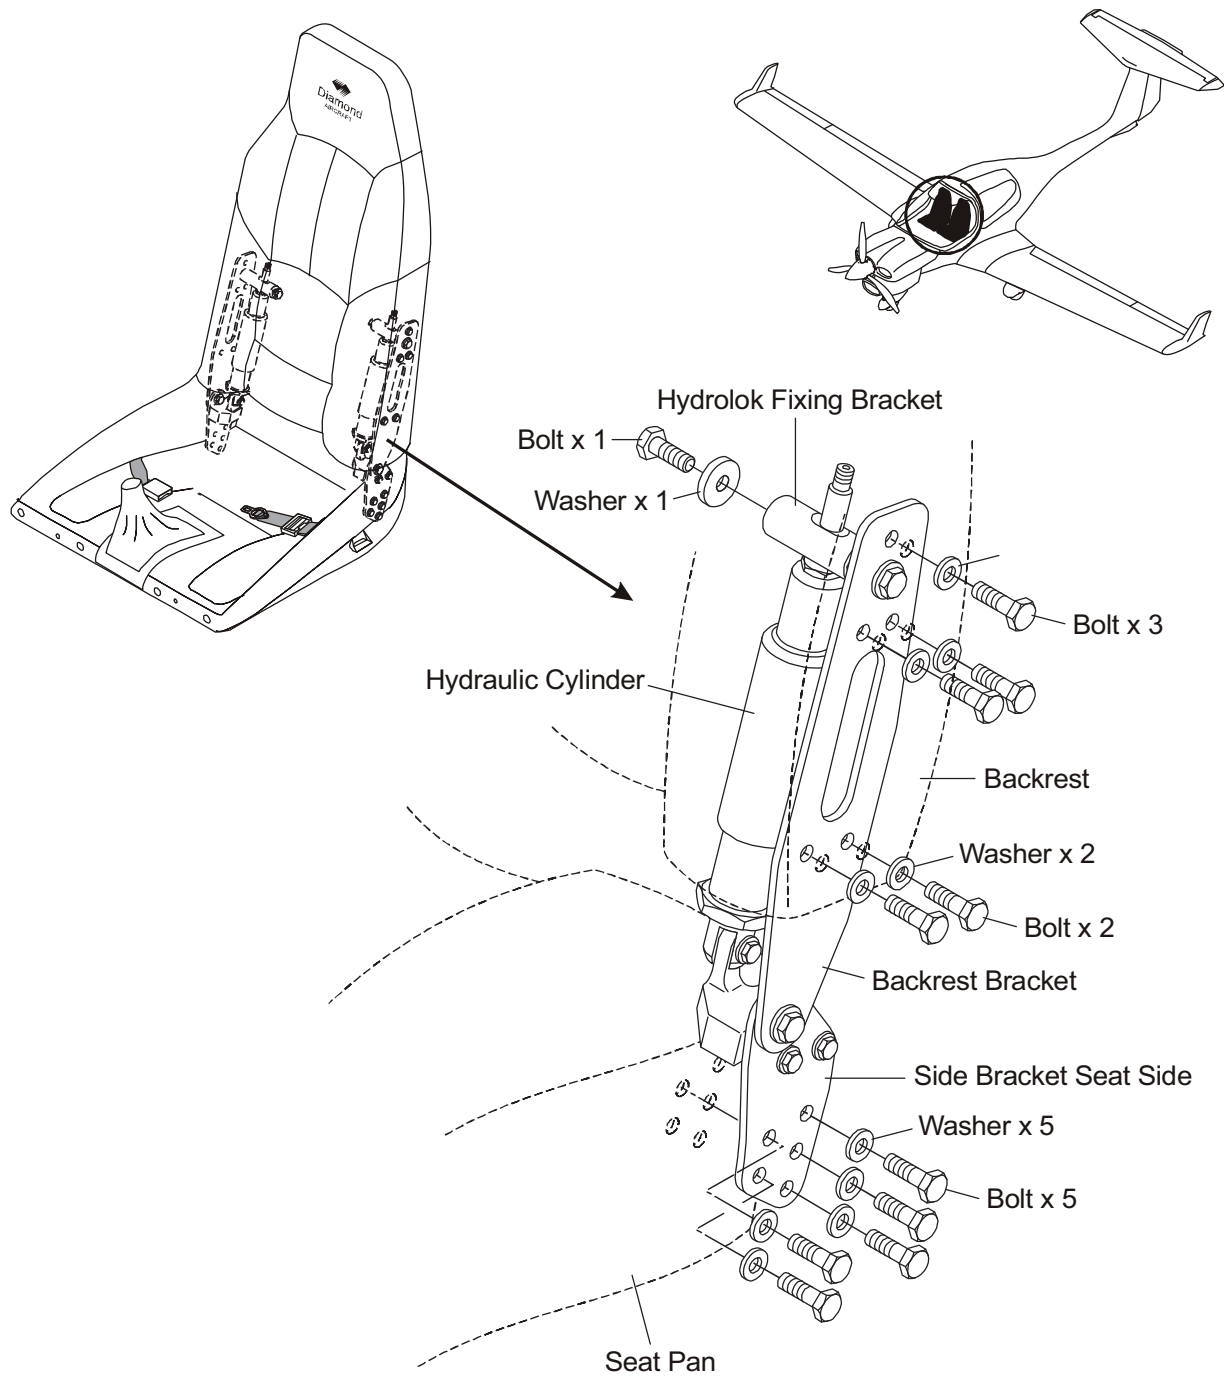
Adjustable Backrest Assembly (if OÄM 40-375 is installed)
